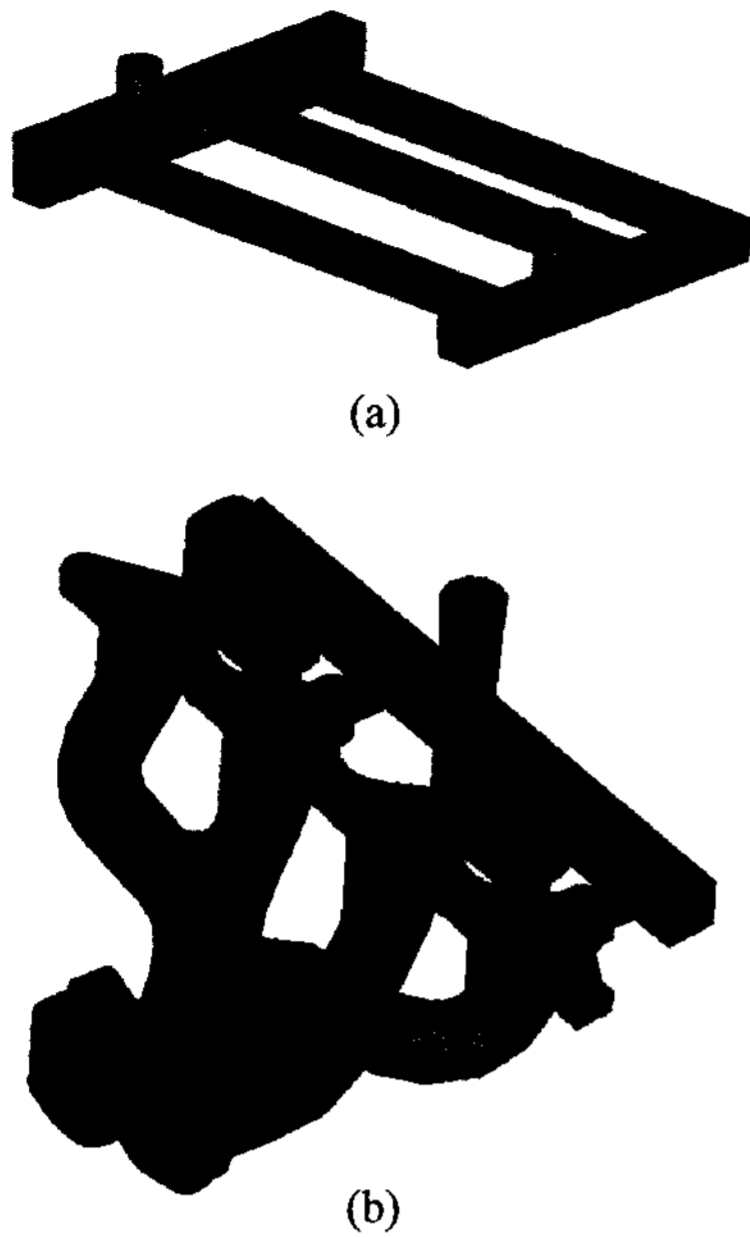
Three dimensional solid models of (a) test casting and (b) exhaust manifold.
